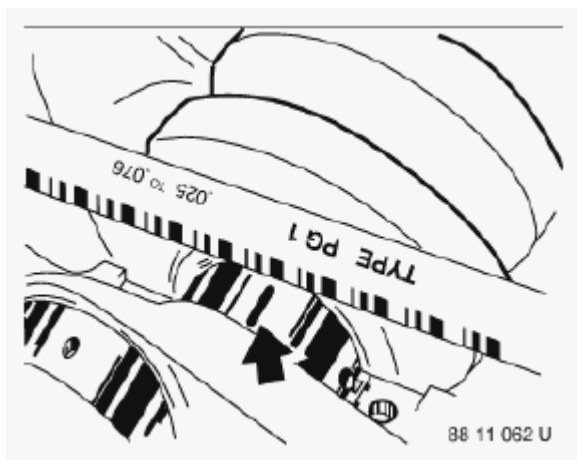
Reading Bearing Play At Width Of Flattened Plastic Thread And Measurement Scale
